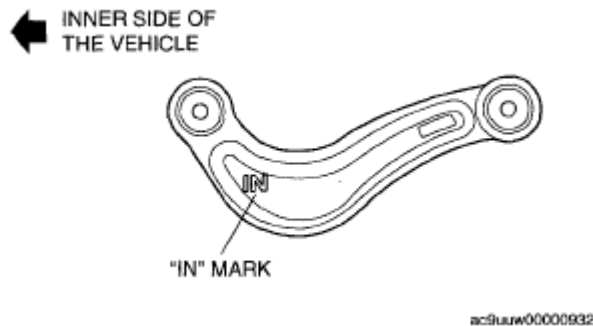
Identifying Alignment Mark On Rear Upper Arm
